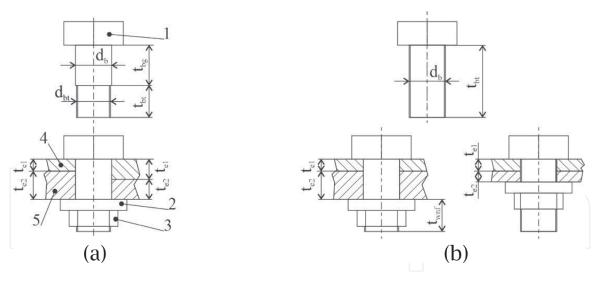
Aviation bolt joint (a) and general engineering bolt joints (b): 1, bolt; 2, washer; 3, nut; 4, 1st jointed element; 5, 2nd jointed element.
